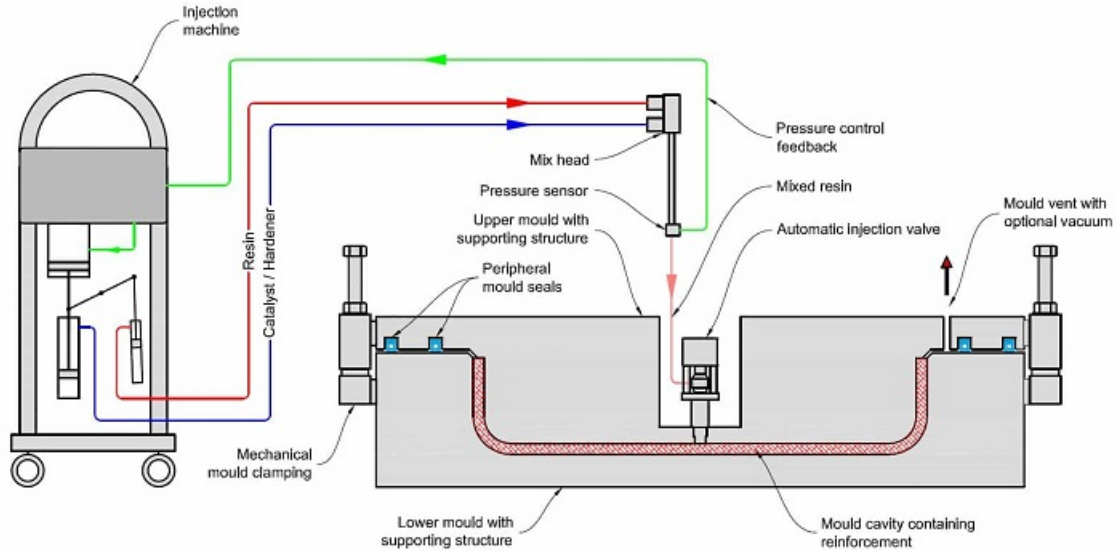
Resin Transfer Moulding (RTM) manufacturing process [11].
